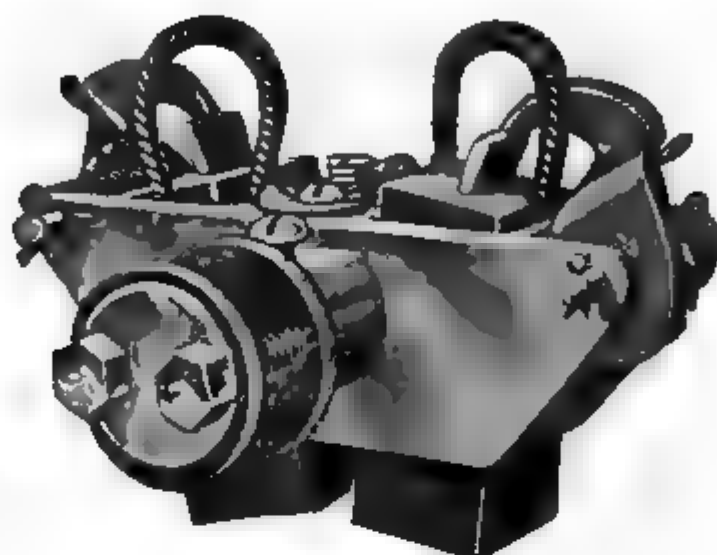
,561.—Triumph brushes and brush holder. The holder is of the box type provided with an adjustable tension spring, making the brushes self-feeding. Each holder is carried on insulated studs attached to a cast iron yoke which is mounted on the bearing.
